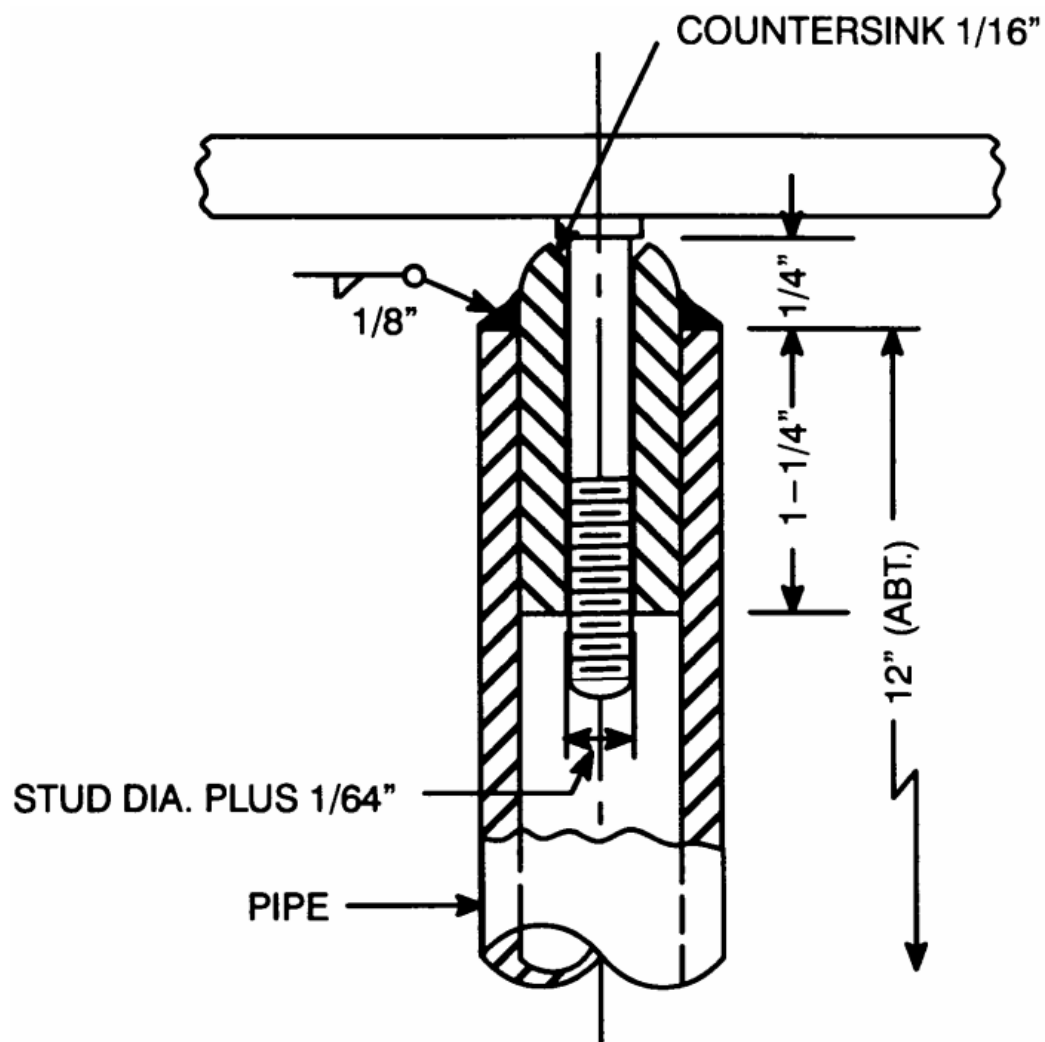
DEVICE FOR BEND TESTING WELDED STUDS.
